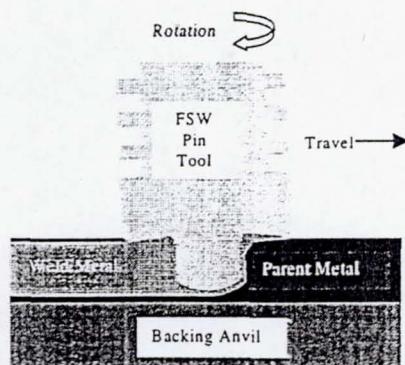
Schematic of Friction Stir Weld Tool Function
